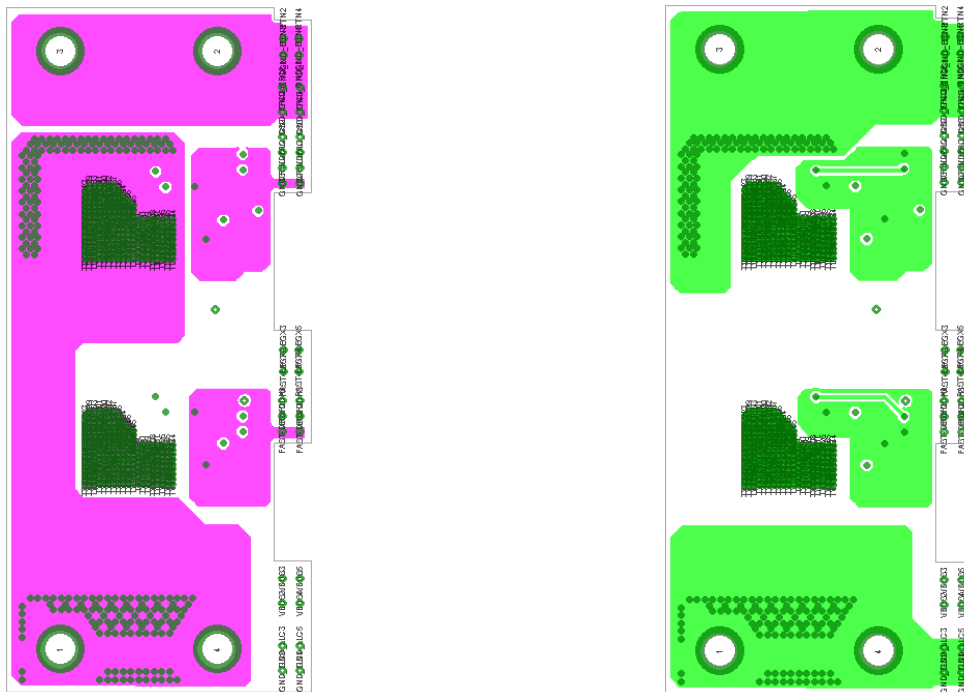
Inner Layers PCB Layout of LLC HALF BRIDGE CARD
